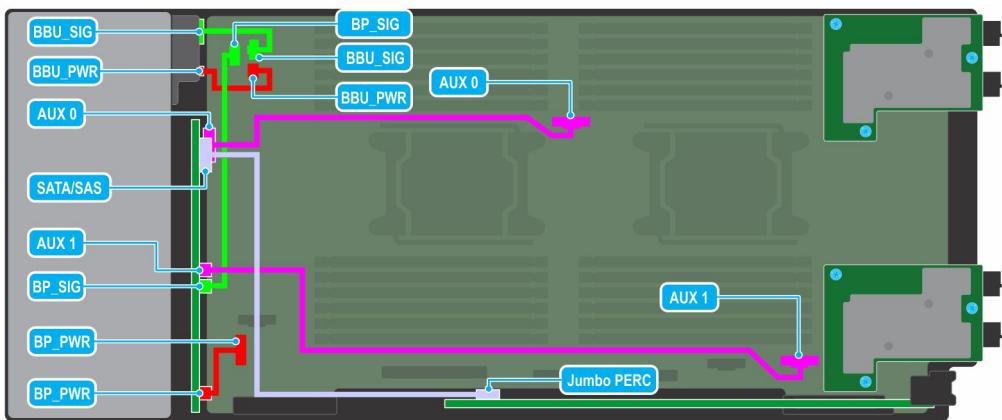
Cable routing - 4 x 2.5 PCIe backplane with Jumbo PERC card
